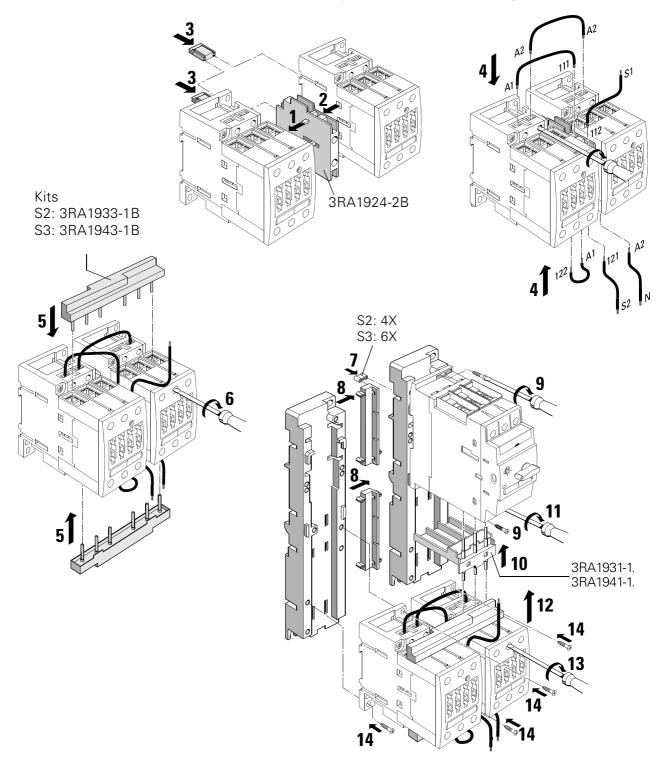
Self-assembly, rail, reversing operation (frame sizes S2 and S3)
